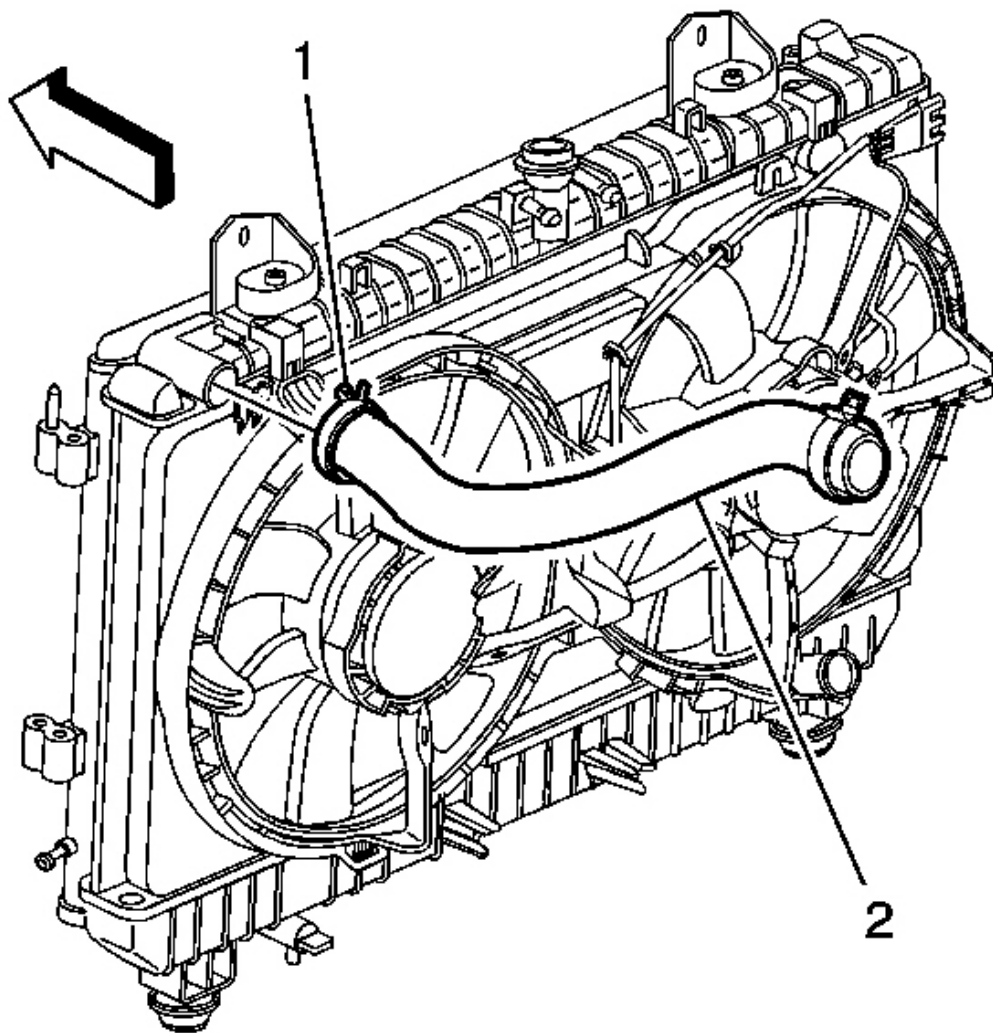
Radiator Inlet Hose & Clamp At Radiator
